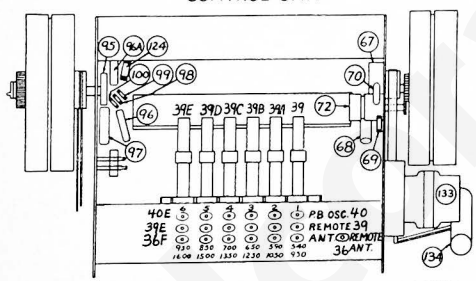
LOCATIONS OF PARTS, TUNING UNIT
